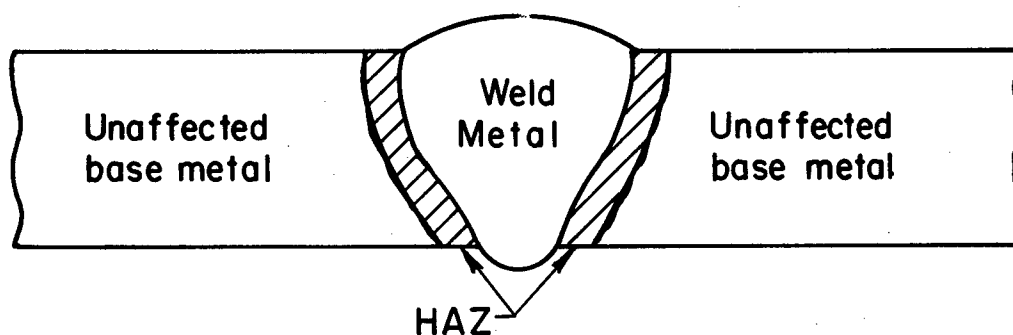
THREE BASIC METAL ZONES IN AN ARC WELD
